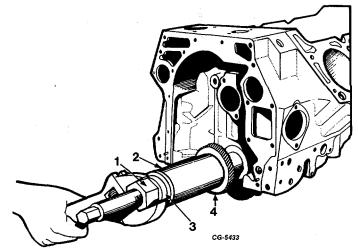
Installing Crankshaft Gear with SE-1900 Installer and SE-1900-18 Adapter
